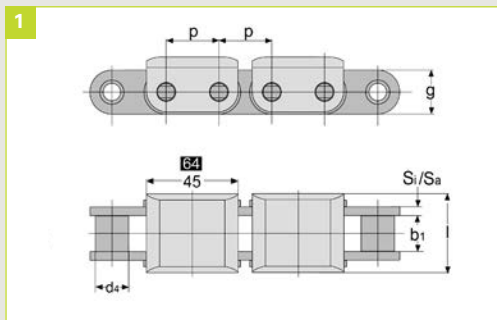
and 4: Roller chains with welded-on carrier plates
